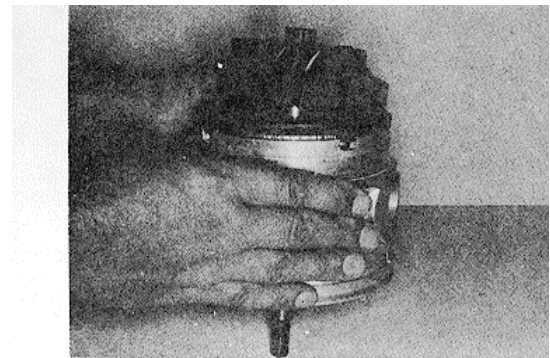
, T-430. Removing rotor shaft from bearing housing
